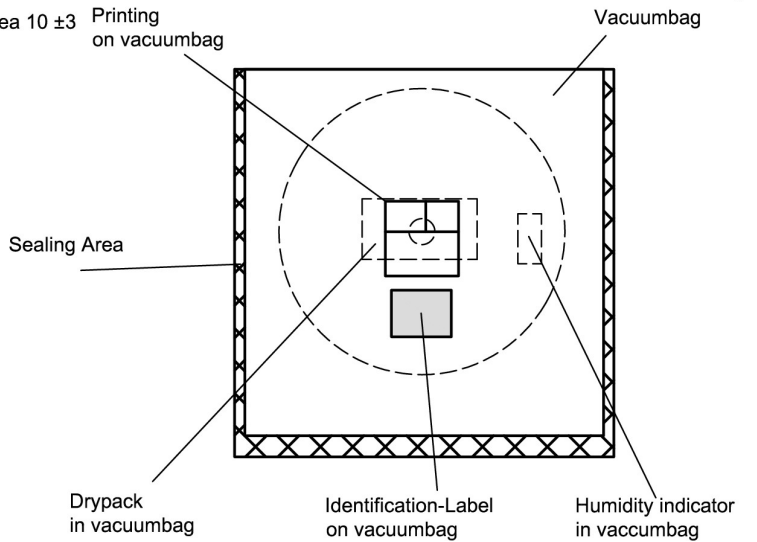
Drawing of moisture barrier bag (MBB) for reel with diameter of 330 mm.
